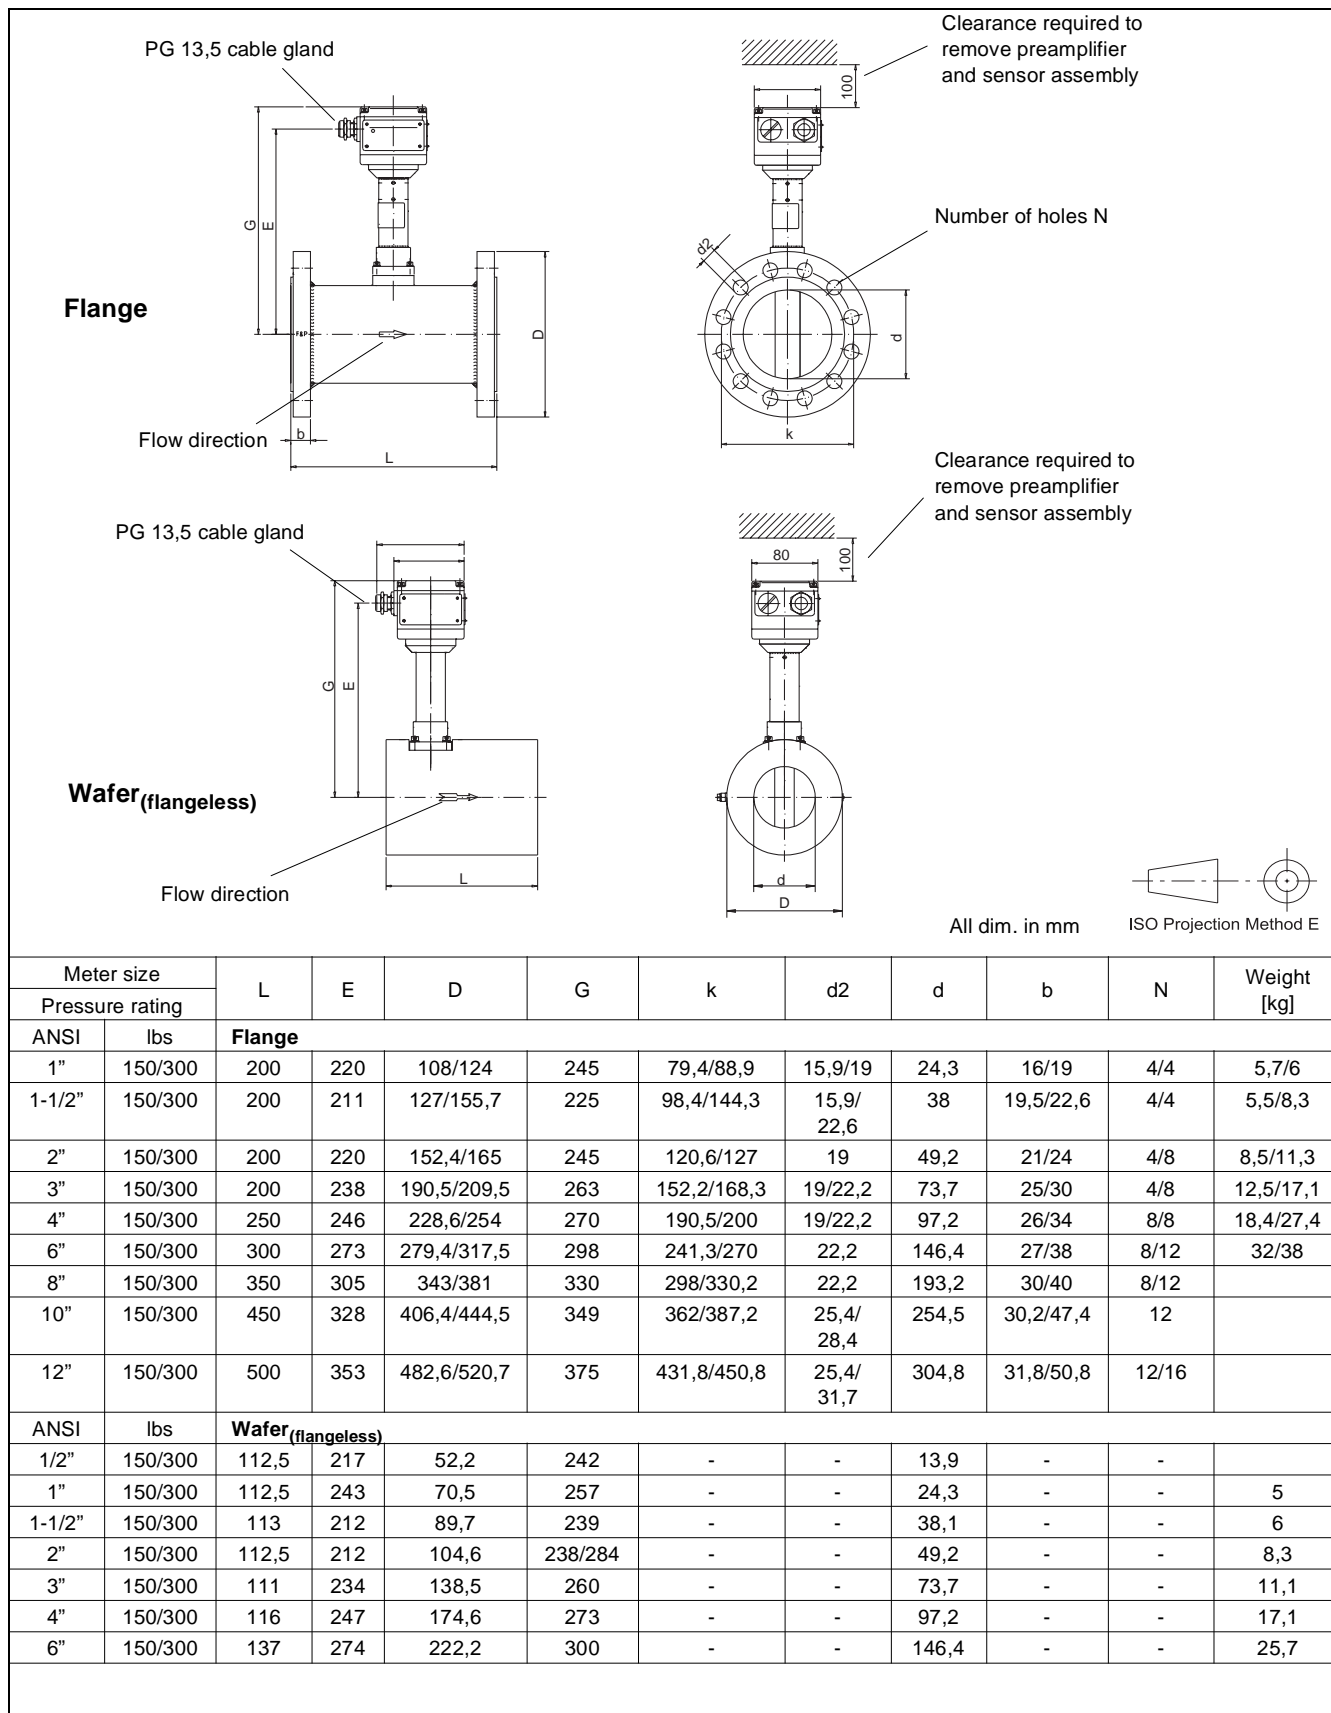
Dimension drawings of VORTEX-VM primary, ANSI
